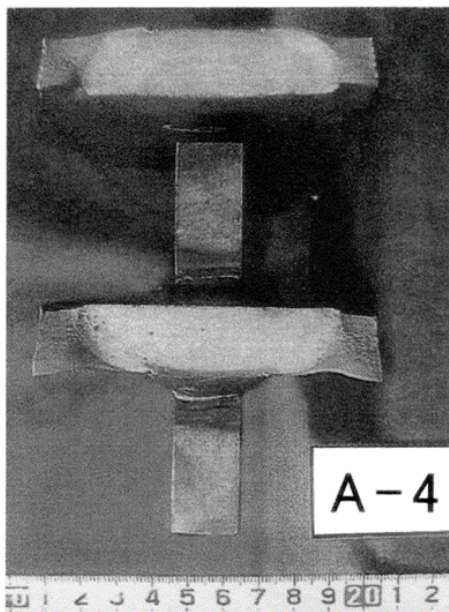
Fracture surface after fatigue test (Type A, 200 N/mm<sup>2</sup>, 1.28 × 10<sup>5</sup> cycles)
